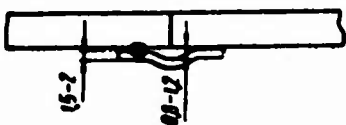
Residual lining, applied during welding of locking seams.
